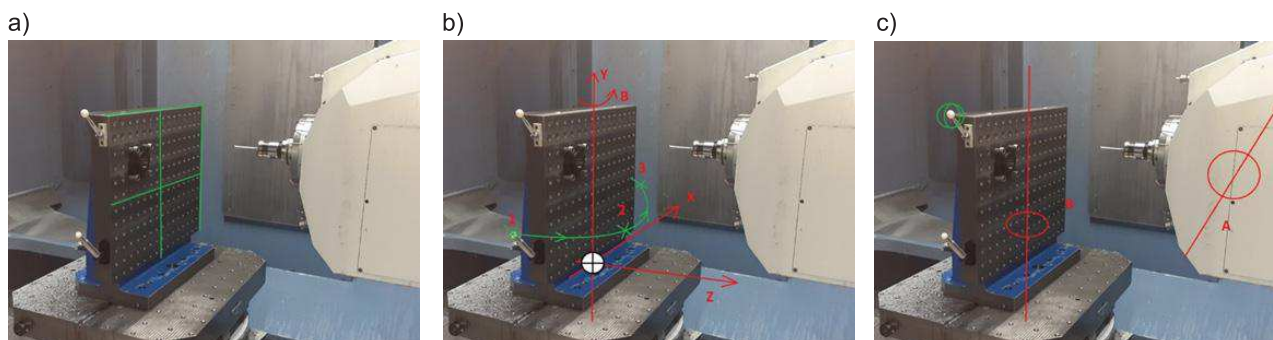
View of the calibration master (two reference sphere's, calibration column), together with the RMP600 probe, inside 5-axis machine center: a) geometry measurement, b) machine zero measurement, c) kinematic vectors test
